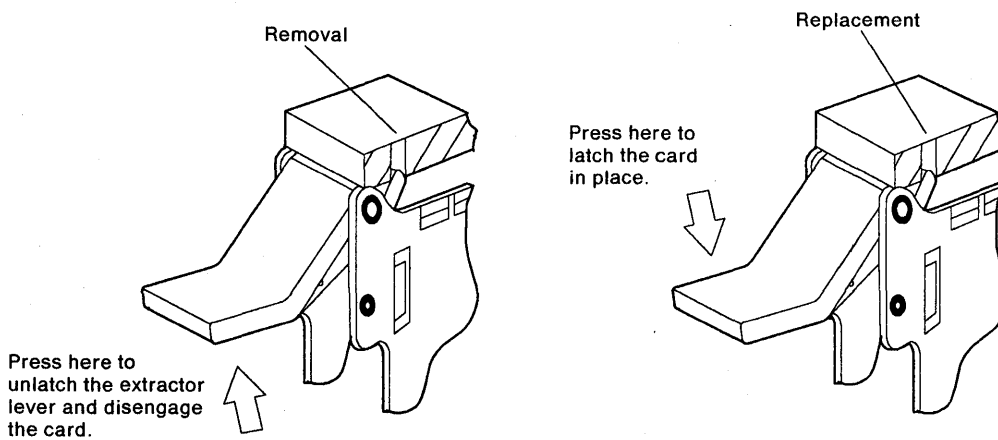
Card Removal/Replacement (Latching/Unlatching Extractor Levers)
